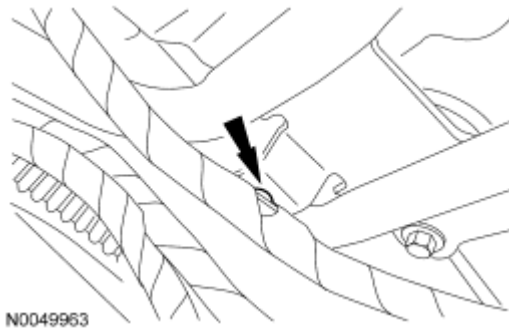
Detaching Wiring Harness Pin-Type Retainer From Coolant Tube Assembly Bracket
